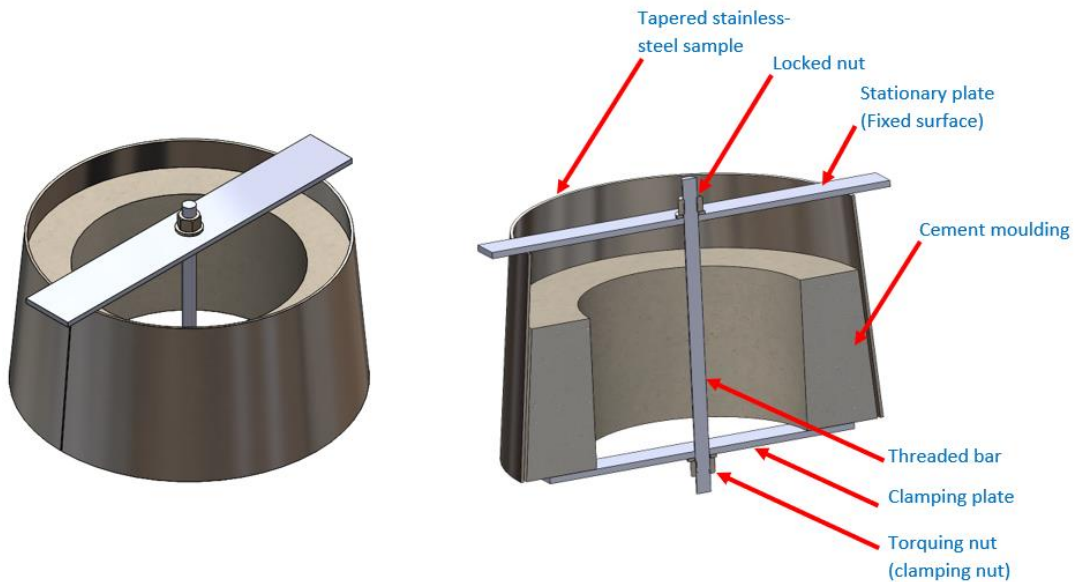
(Left) 3D CAD model of cement moulding being pressed into a Stainless-steel tapered sample using an M12 threaded bar cross section view of the setup. (Right) Cross-sectional view of the clamping arrangement. (The circular disc used for clamping are replaced with a rectangular plate in image for visual clarity)
